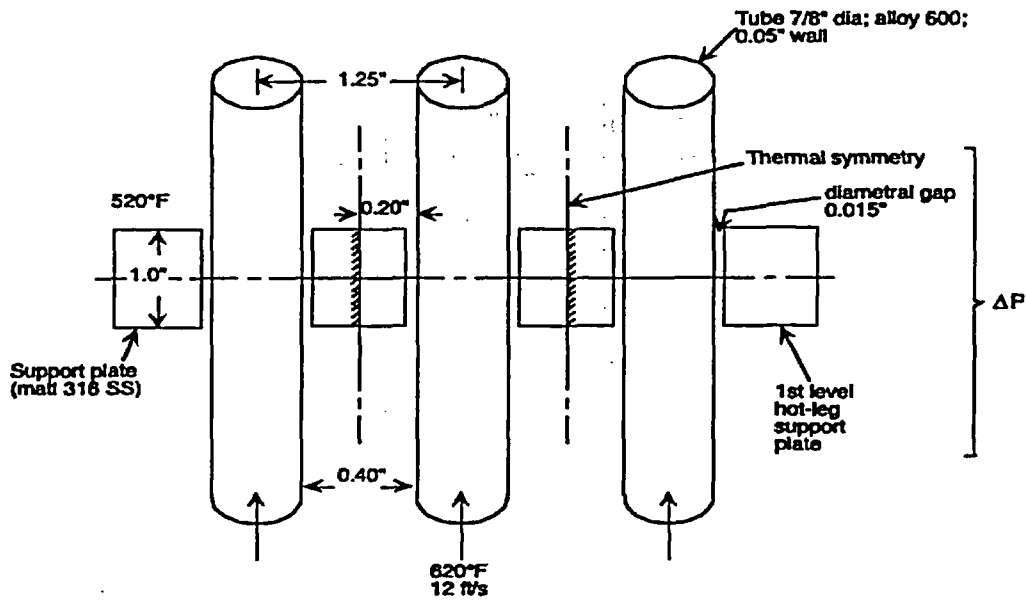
Crevice geometry in prototype drilled-hole support plate tube
